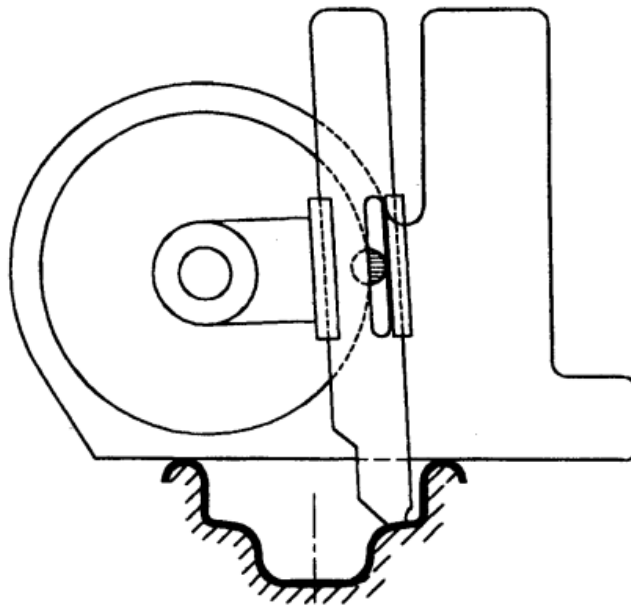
MEASURING PRINCIPLE OF BEAD SEAT ANGLE 'B'
